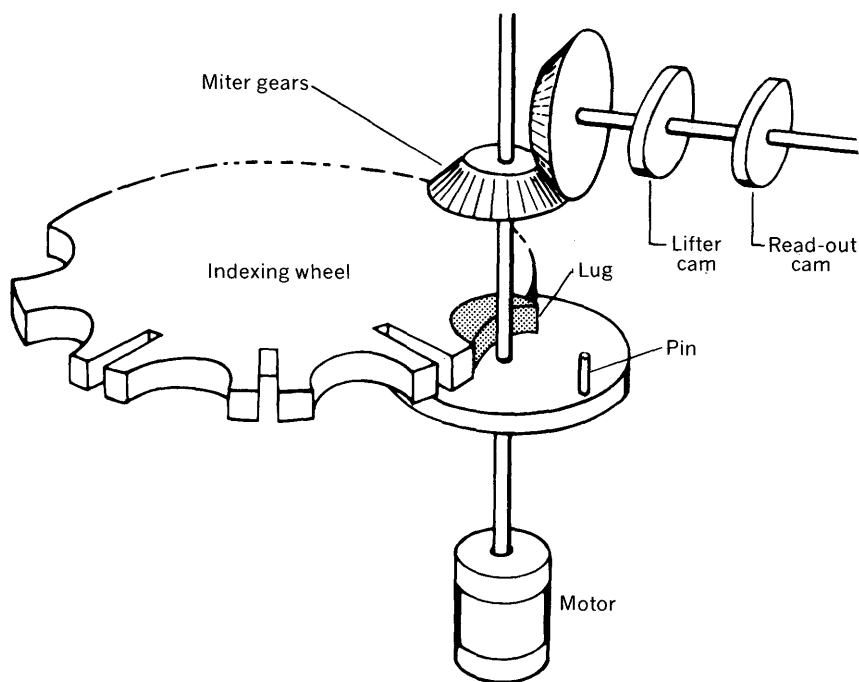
Schematic sketch of pin drive of Geneva mechanism and associated miter gears and cams.
